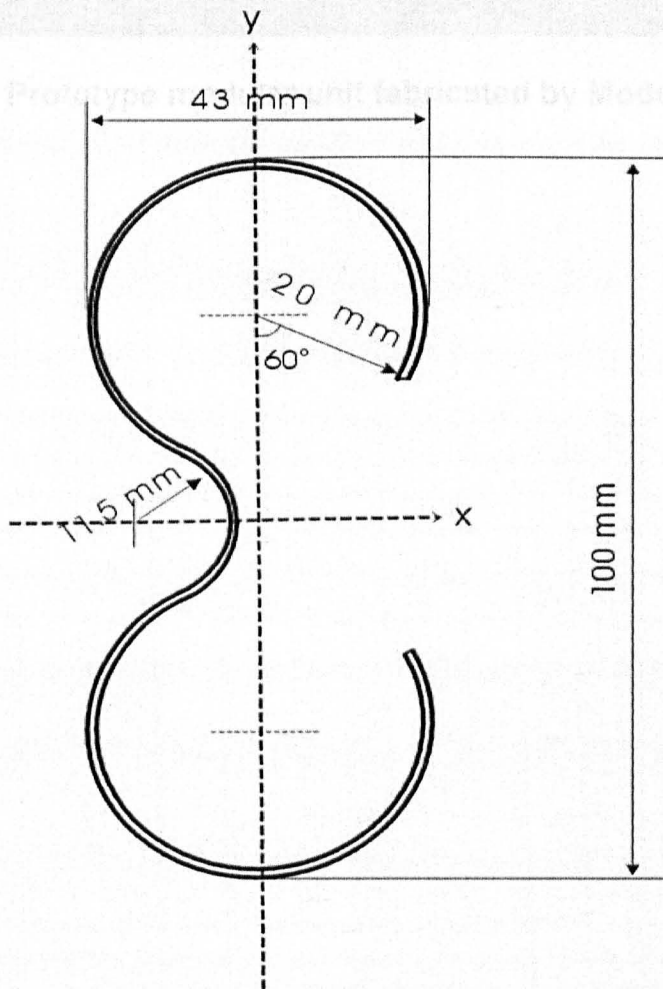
Cross-section of ϵ -section with 1.5 mm wall thickness.
